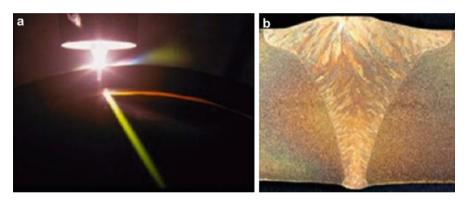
(a) K-TIG welding process; (b) macro of the K-TIG weld (Santhakumari 2018)
